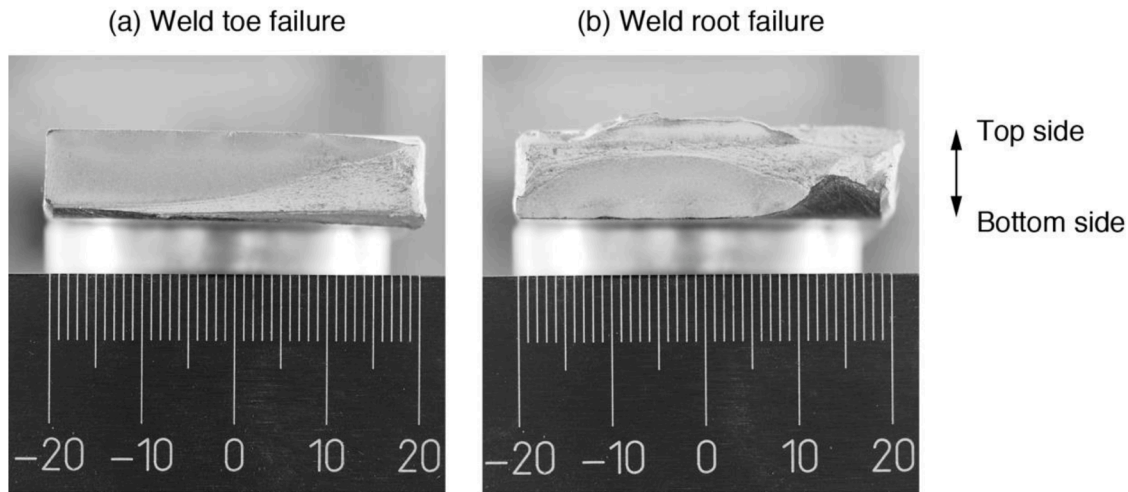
Fracture surface of S500G1+M butt-weld specimens with (a) weld toe and (b) weld root failure, and scale in millimetres.
